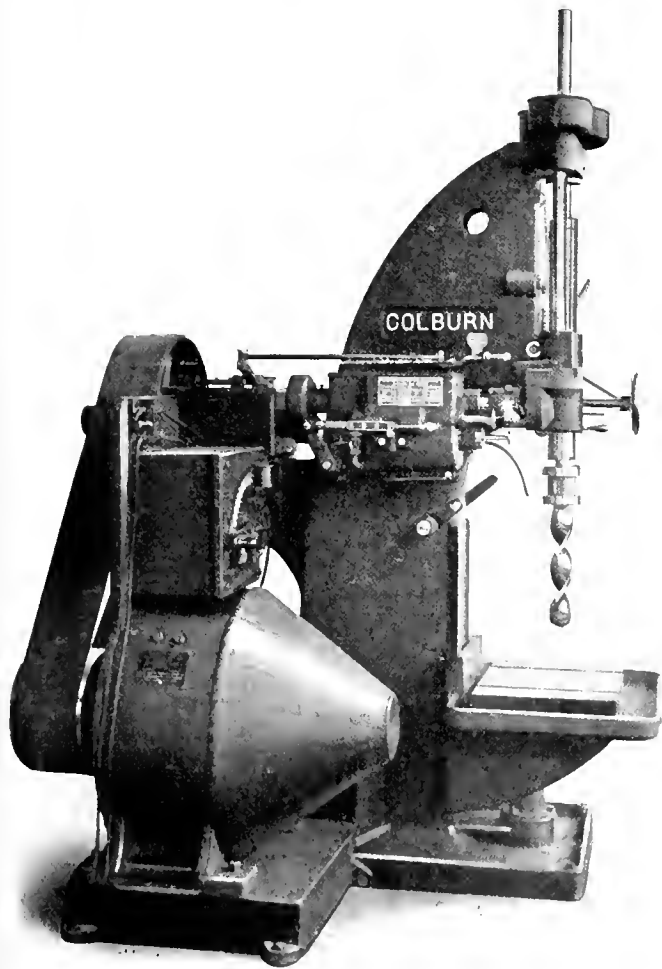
Colburn 24-inch Heavy-duty Electrically-driven Drill Press
